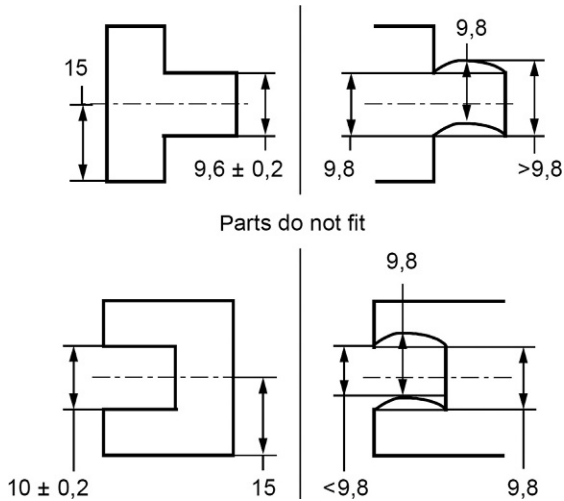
Sizes, \pm tolerance without modifier, ambiguities
